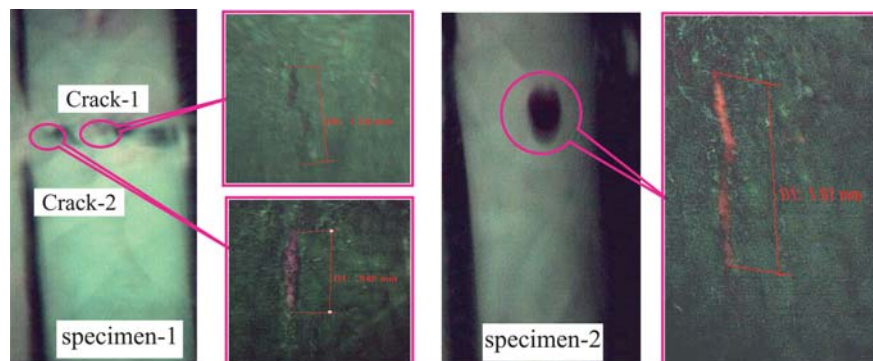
Longitudinal cracks seen in the fuel pins at the welding zone
